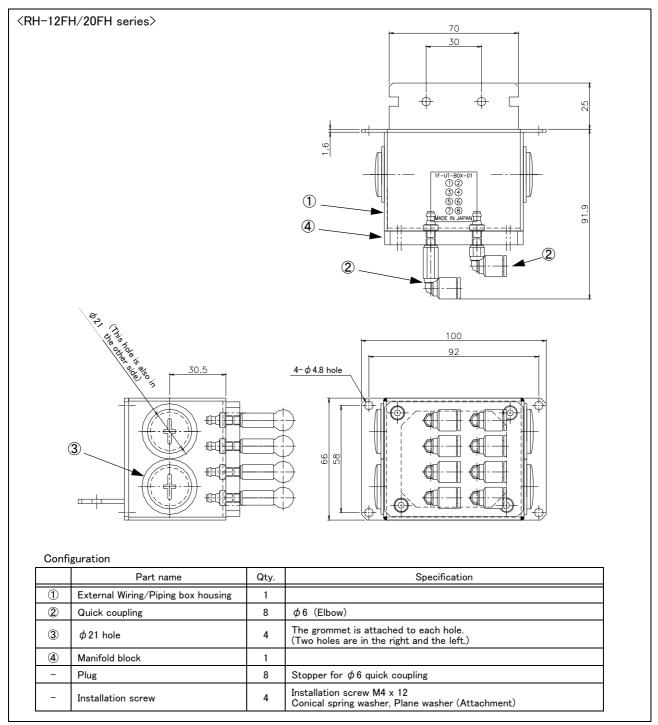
Outline dimension and configurations (RH-12FH/20FH series)
